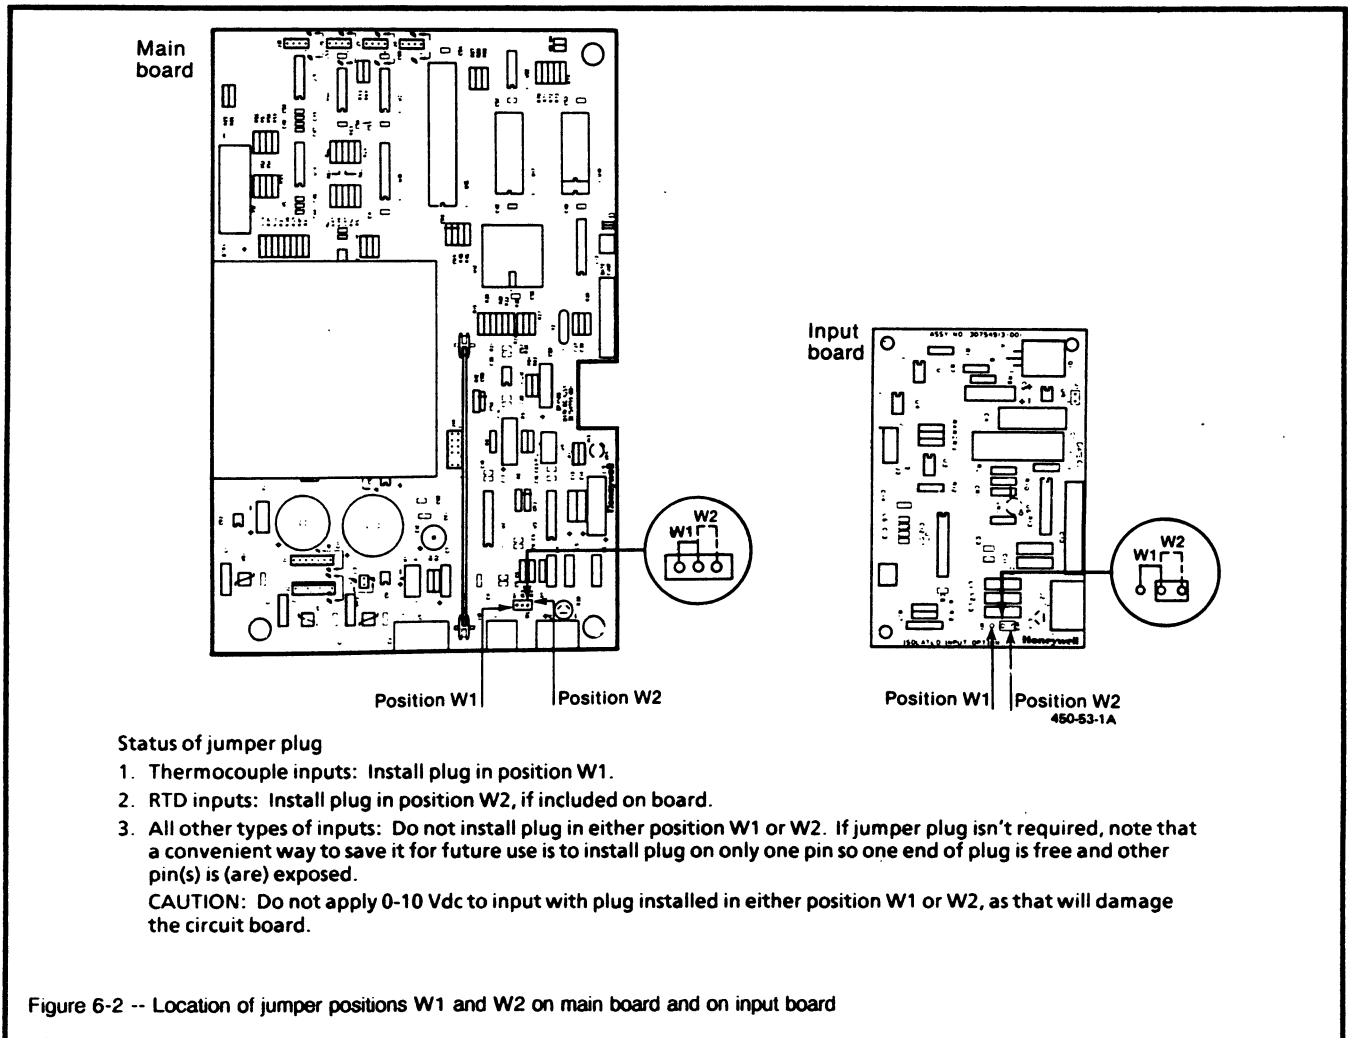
Location of jumper positions W1 and W2 on main board and on input board
